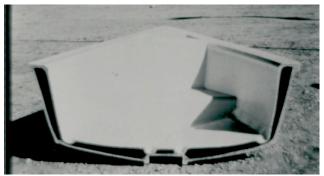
Cross-section of a boat hull with closely spaced parallel walls.
